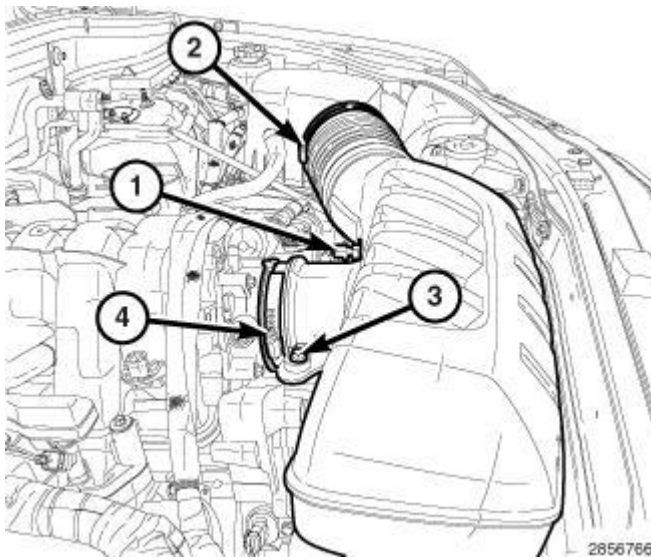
Intake Air Temperature (IAT) Sensor, Air Cleaner Housing, Resonator Retaining Bolt & Hose Clamp
